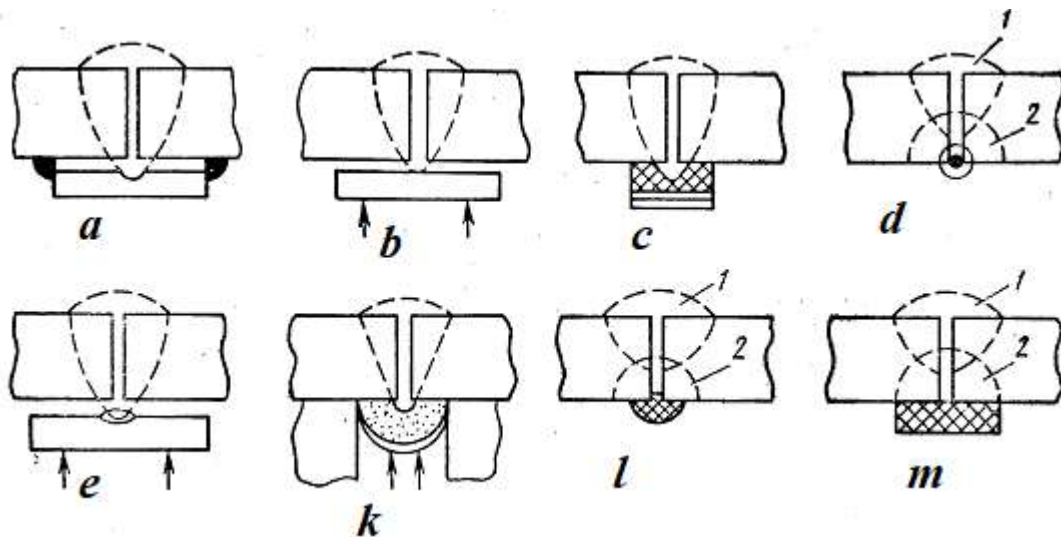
Schemes of devices for holding the weld pool and slag and forming a return roller during submerged arc welding:
